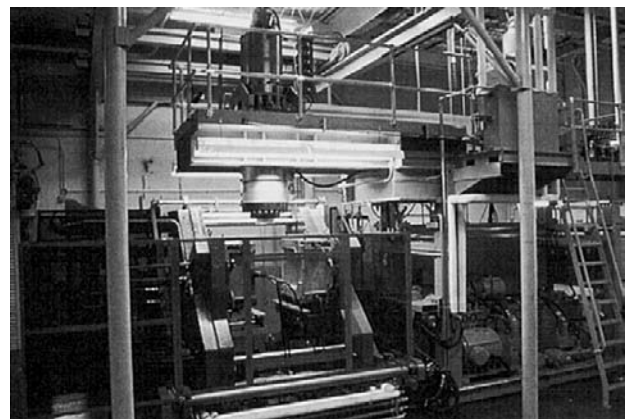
is a photo of a large 1320-gal HDPE tank being produced on a Kautex accumulator machine.
